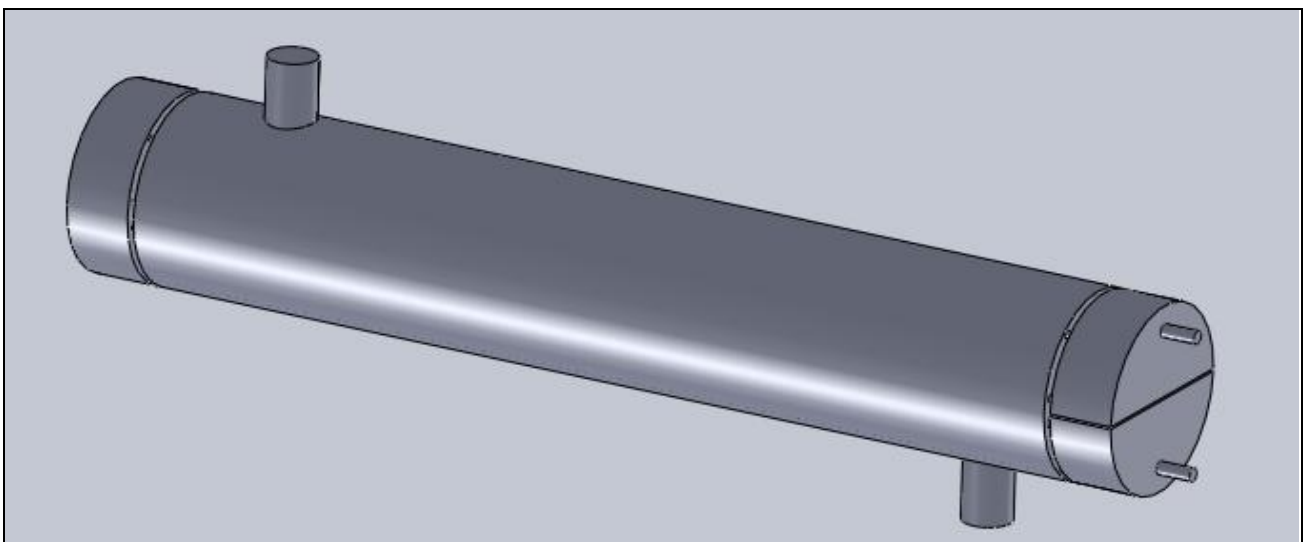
Cavity Models Of Shell And Tube Type Heat Exchanger
